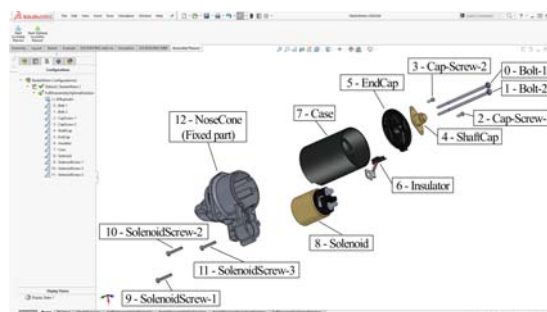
Exploded view generated for the starter motor with the disassembly sequence show in the numbered captions and in the left panel
